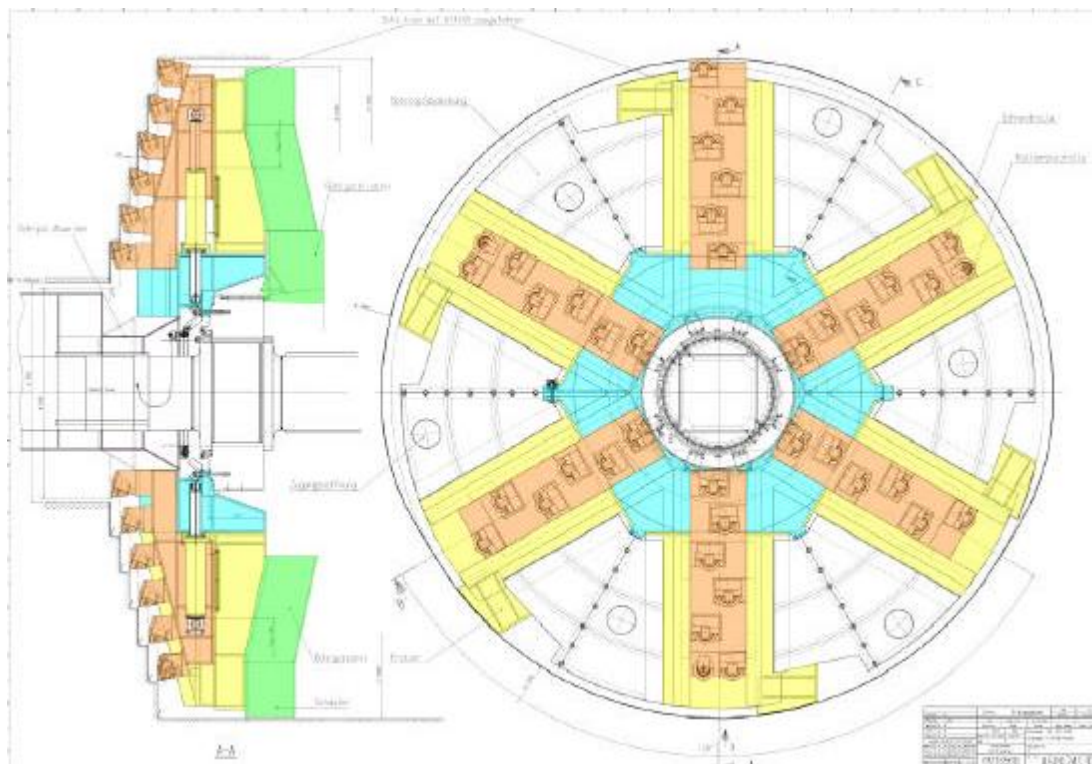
Front view and cross-section of the cutter arms¹³⁹
